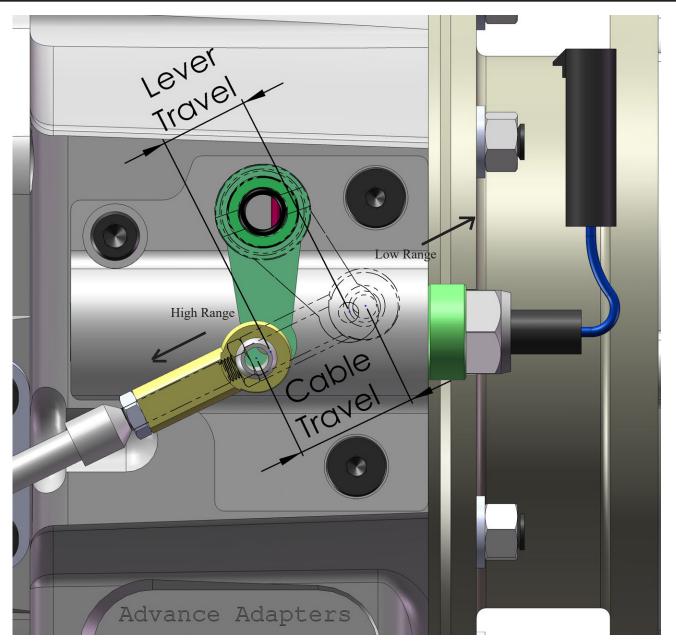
RubiCrawler cable shifter adjustment verification. See Step 2 of the RubiCrawler Universal Shifter Cable Installation section
